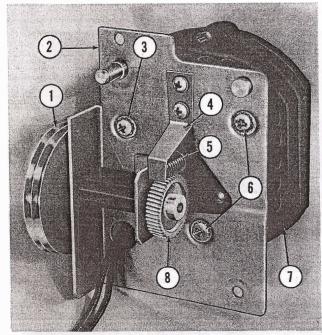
TURNTABLE DRIVE GEAR ADJUSTMENT
